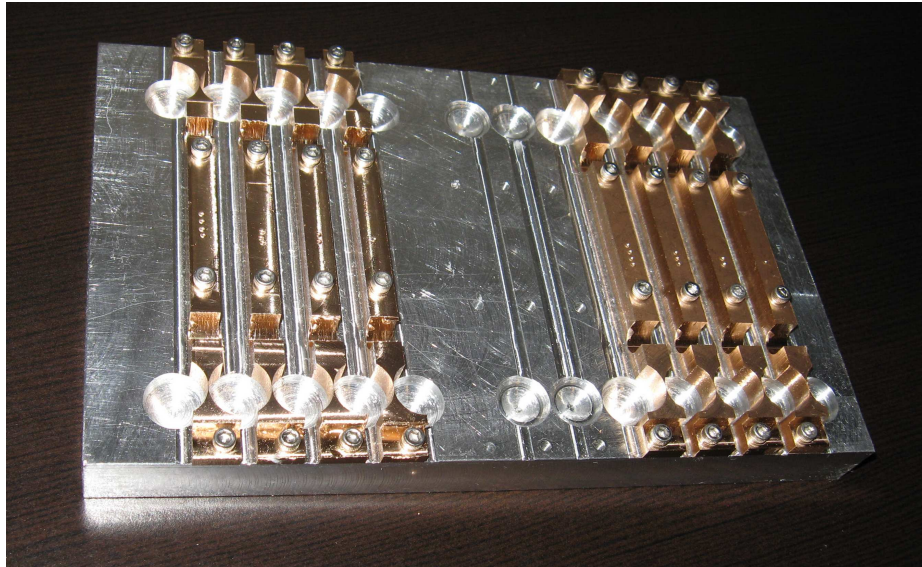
Machined BeCu replacement flexures on fixture plate. The 8 flexures (4 upper and 4 lower) were machined from one plate of BeCu stock.
